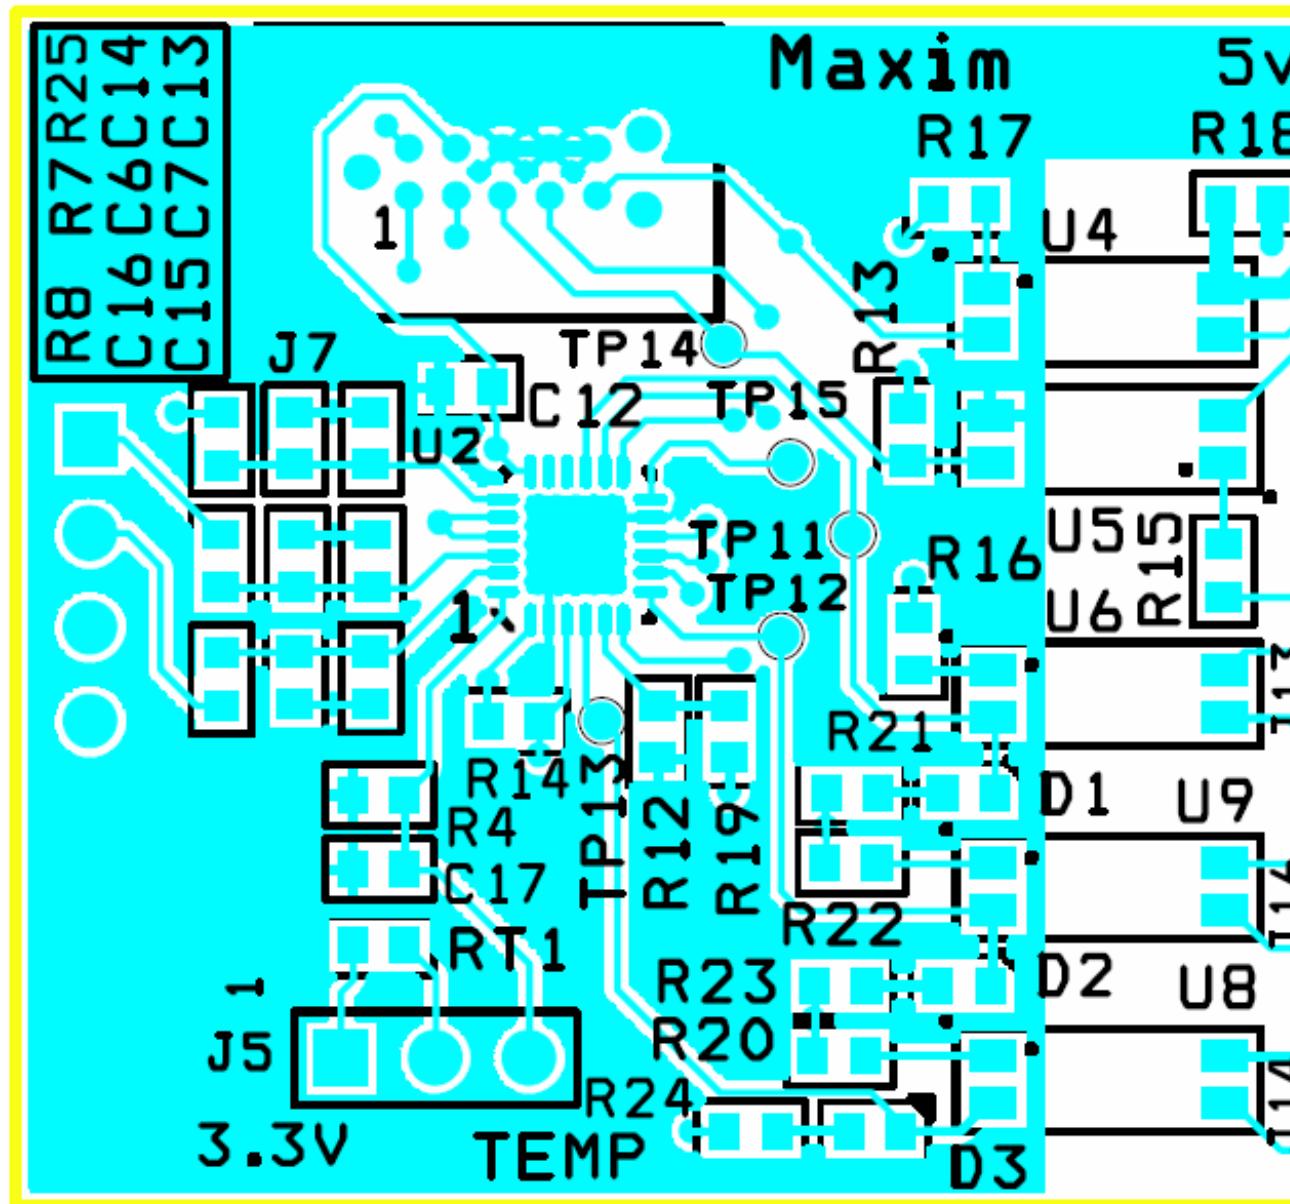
78M6610+PSU 24-Pin Evaluation Board PCB Top View
